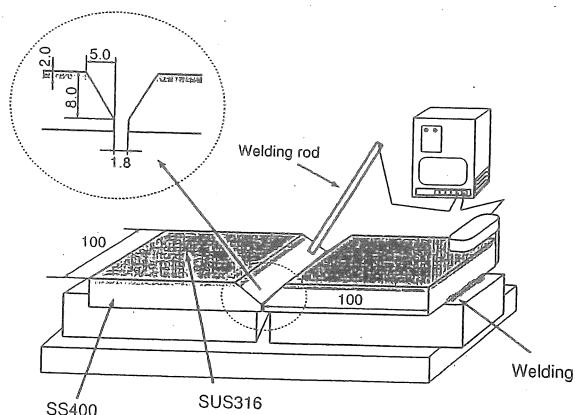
Butt-welding of end-edge constrained clad steel plates
